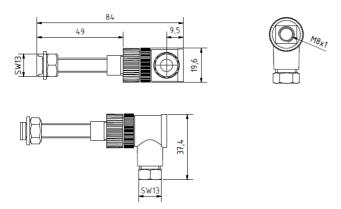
Contacts GSTA, GSTB and GSTW, dimensions in mm
